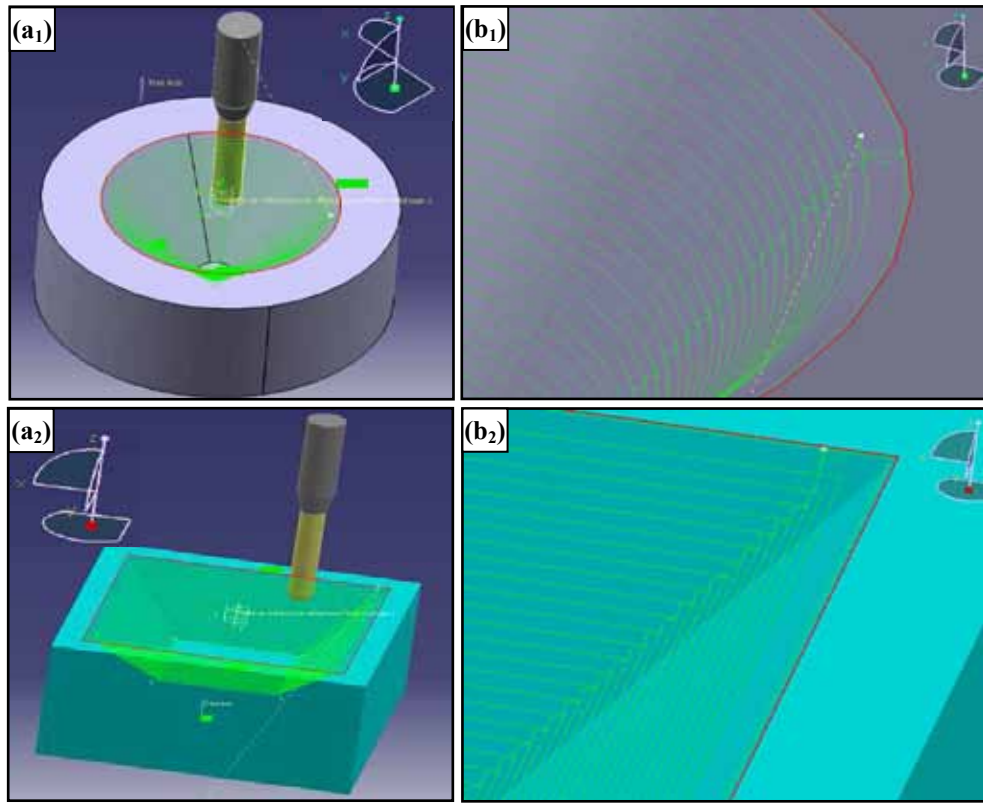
Geometries and dimensions carried out for some parts formed (a) Representative conical frustums with tool path and (b) Representative frustums square pyramid with tool path
